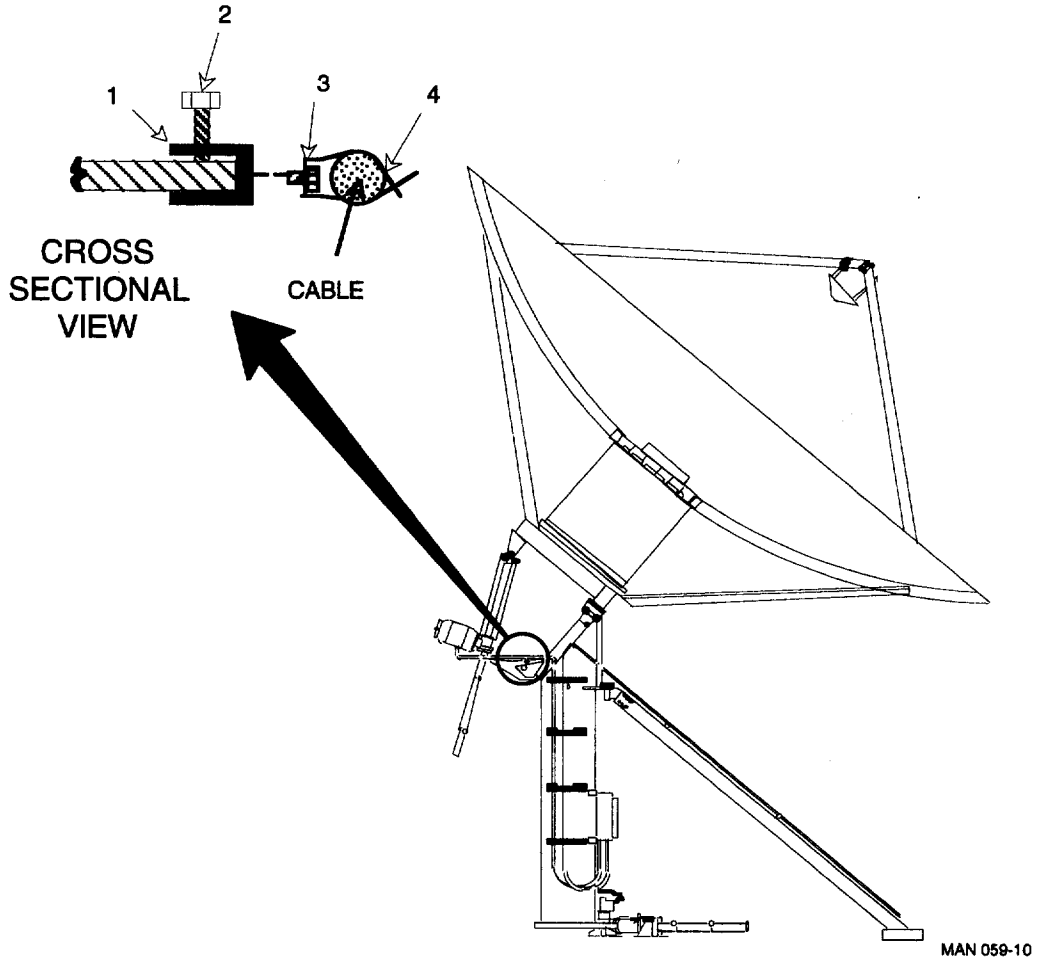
Elevation Cable Routing Diagram, AC Powered Model 8861/8862
